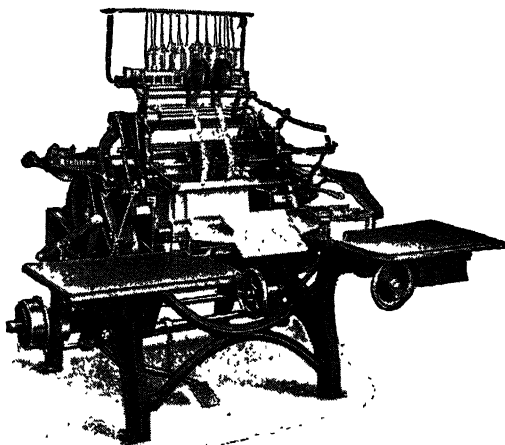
"BREHMER" NO. 33 BOOK-SEWING MACHINE.
